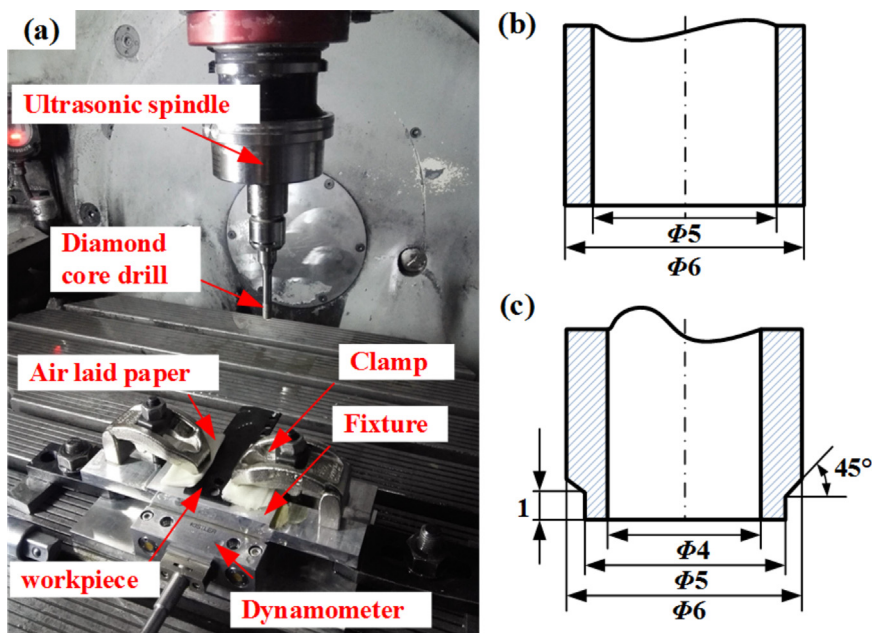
Illustration of experimental setup. (a) Fixturing scheme (b) Dimensions of common drill. (c) Dimensions of compound drill.
